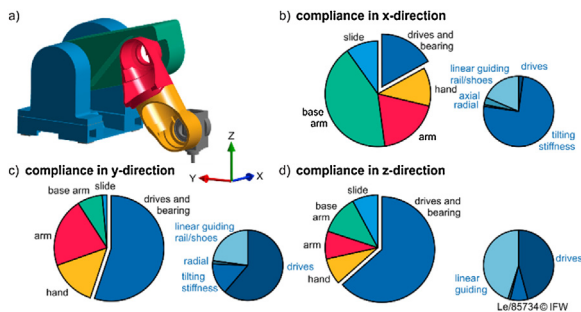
Impact of the machine tool parts on the stiffness at TCP.
